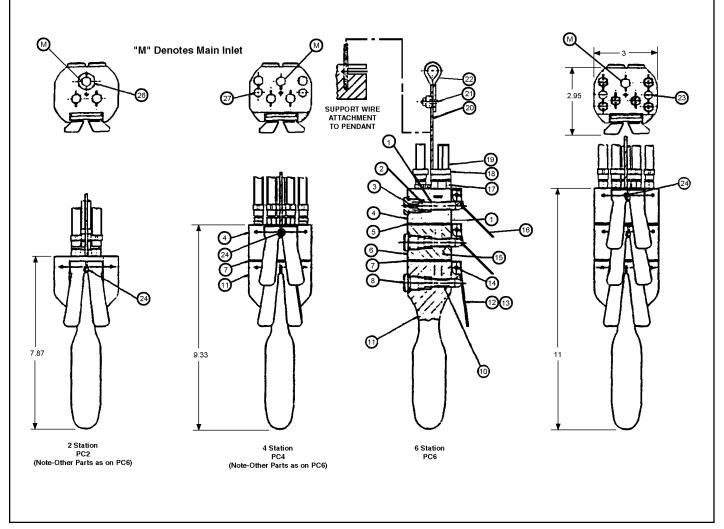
Pendant Control Assemblies PC2, PC4 & PC6
